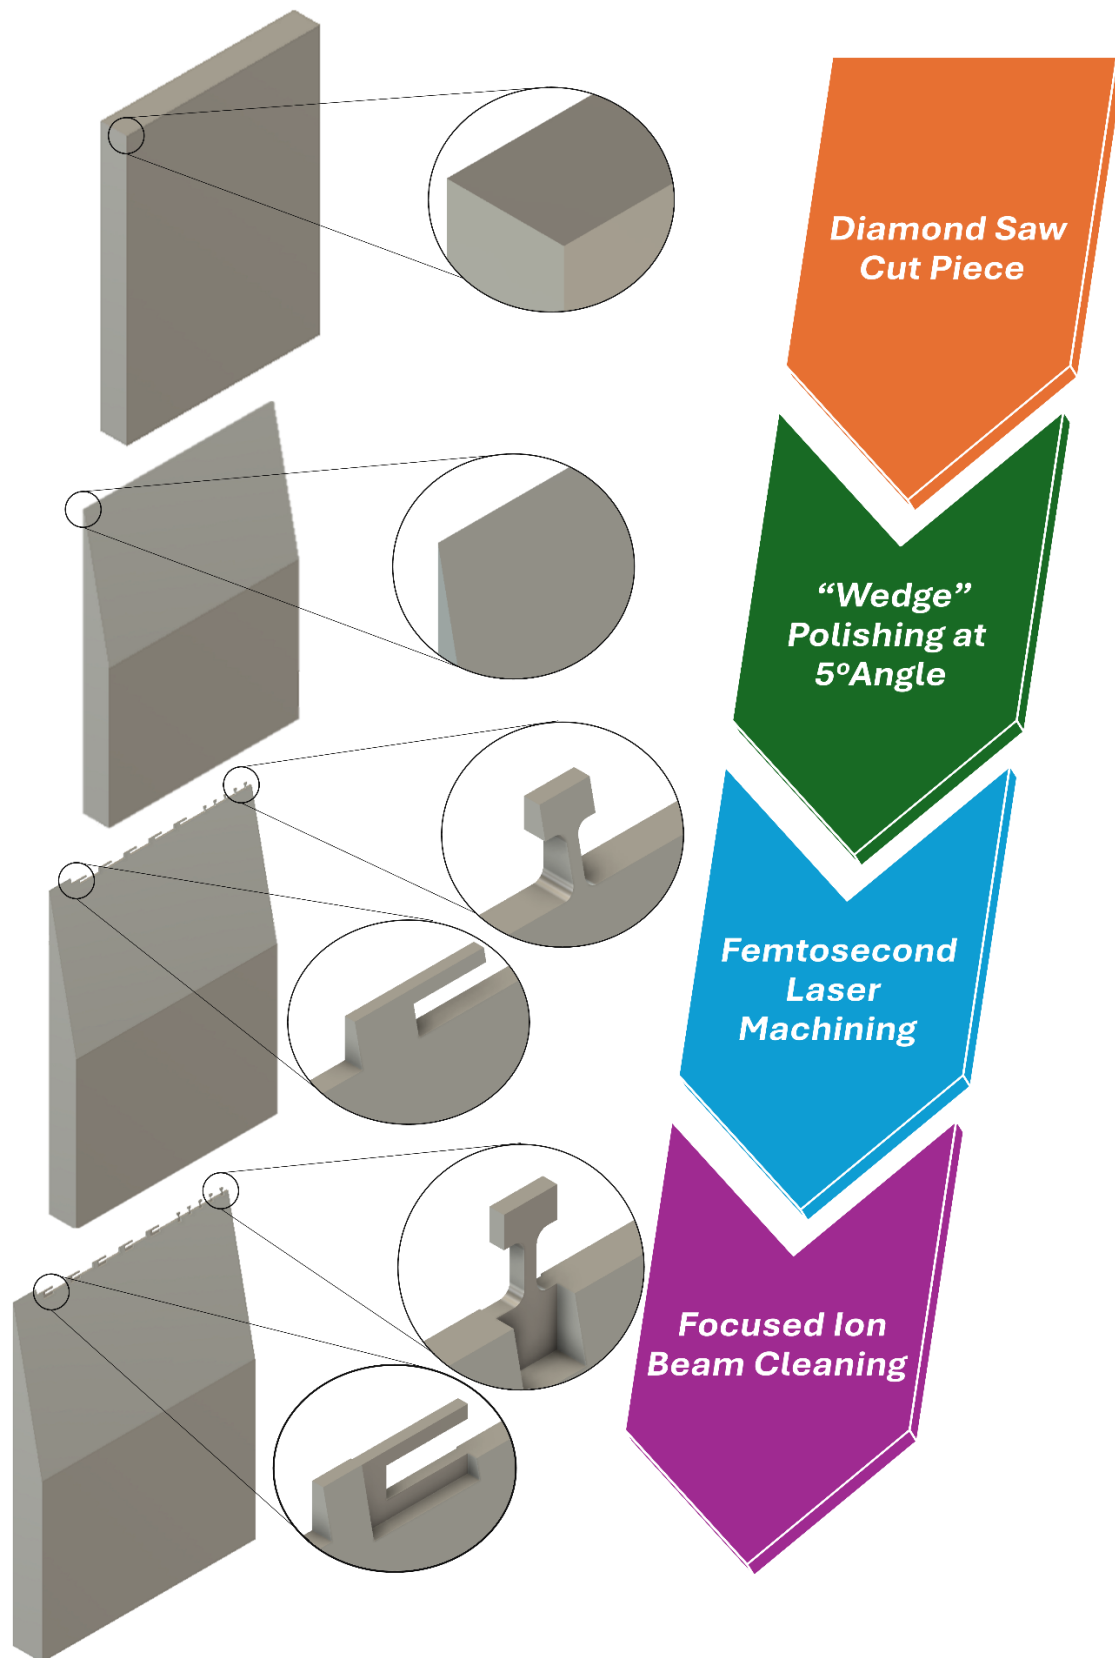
Joint fs-Laser and FIB sample preparation approach to making small scale mechanical testing specimen
